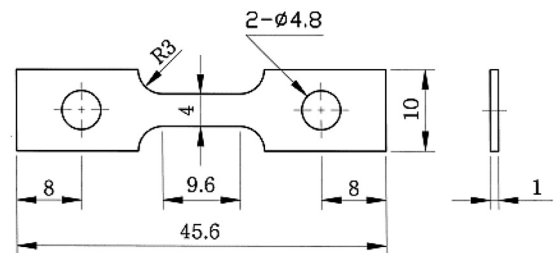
Dimension of tensile creep specimen (unit: mm)
